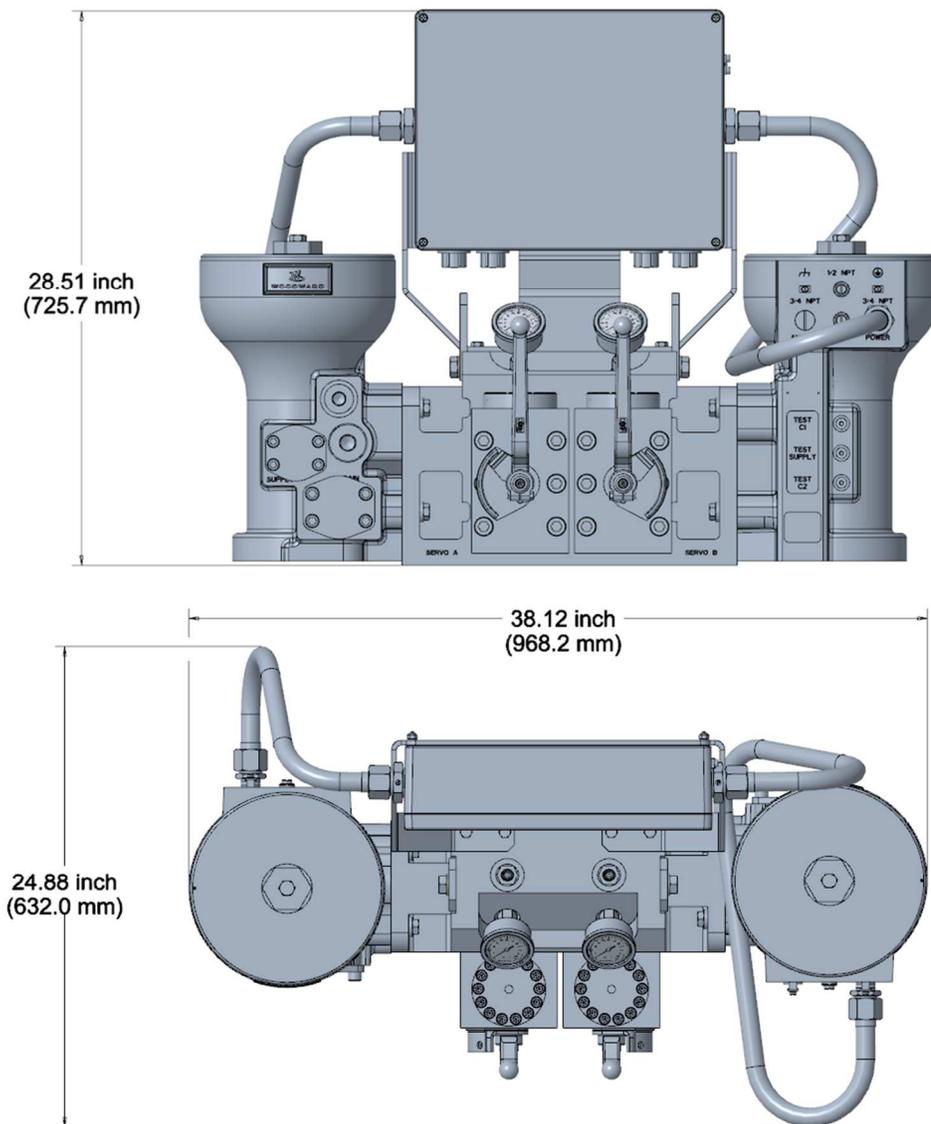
Skid Outline Dimensions (Zone 2 Model)
